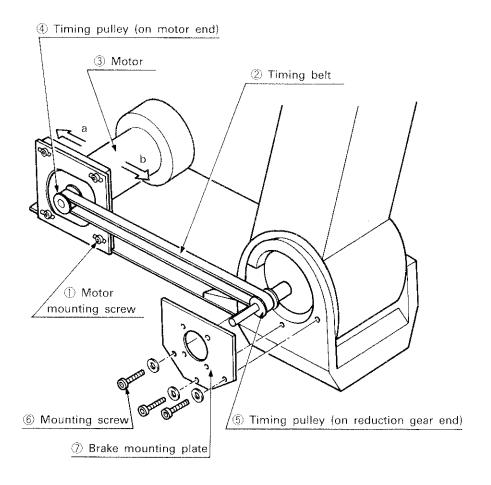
Checking, Adjusting, and Replacing the Shoulder Drive Timing Belt
